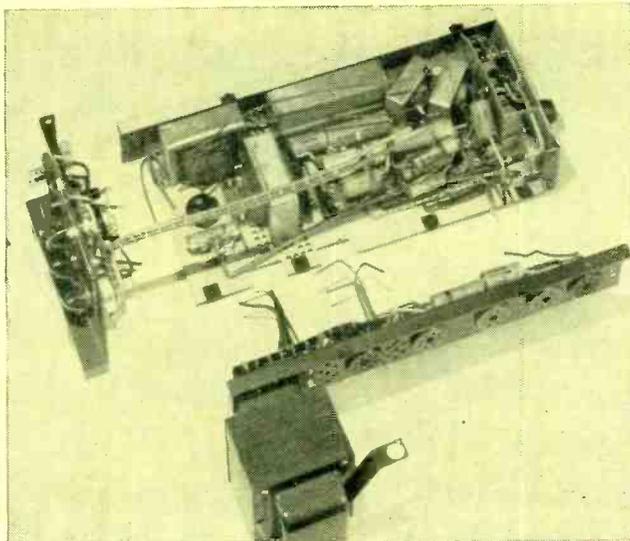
Self-retaining U-shaped fasteners fit over edge of chassis to permit attaching dust cover
